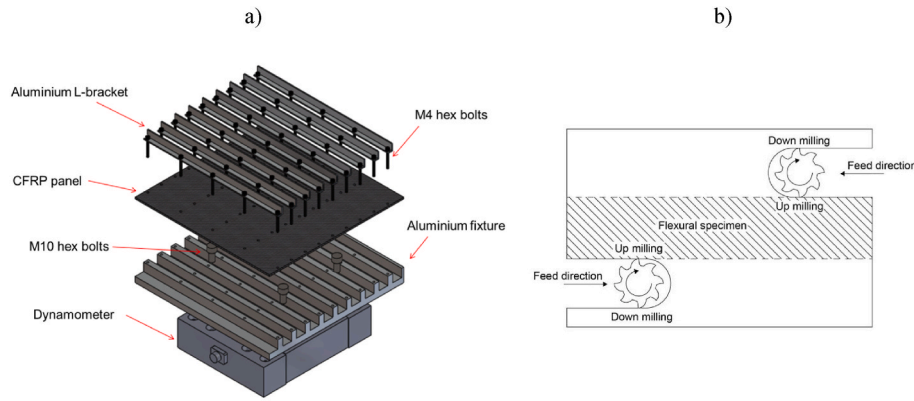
a) milling fixture layout and b) cutting strategy for generation of flexural specimens.
